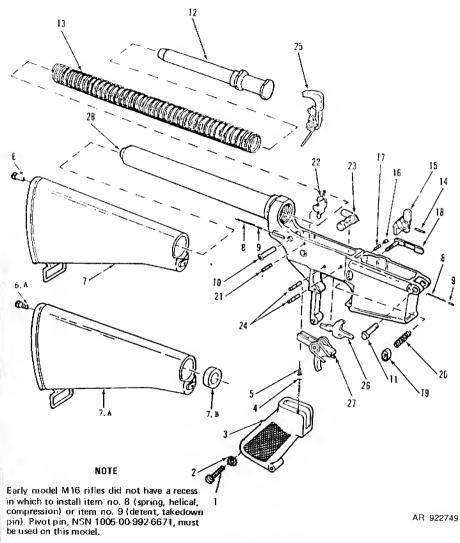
Lower receiver and extension assembly 8448604 (M16) and 8448578 (M16A1)
